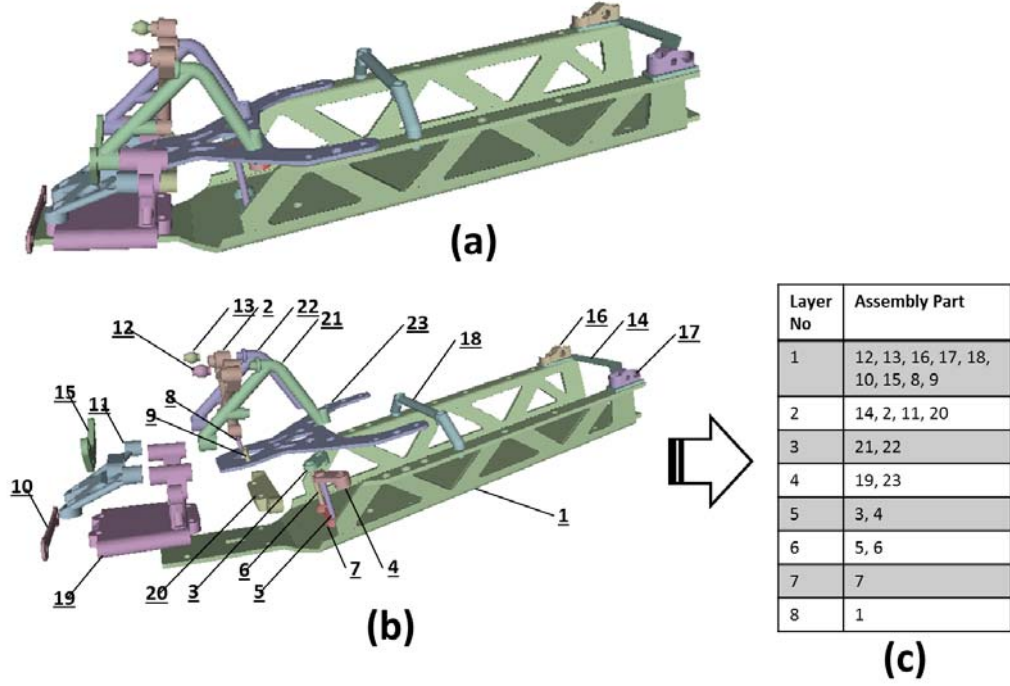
(a) 23-part assembly. (b) Exploded view. (c) Generation of disassembly layers for 23-part assembly.
